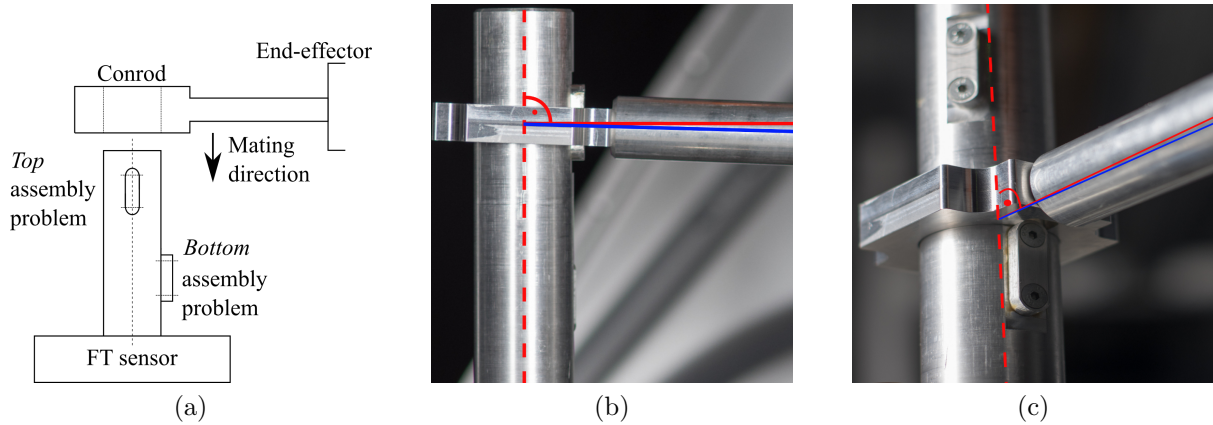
The overall approach. (a) Sketch of the experimental setup. (b) *Top* assembly problem. (c) *Bottom* assembly problem.
